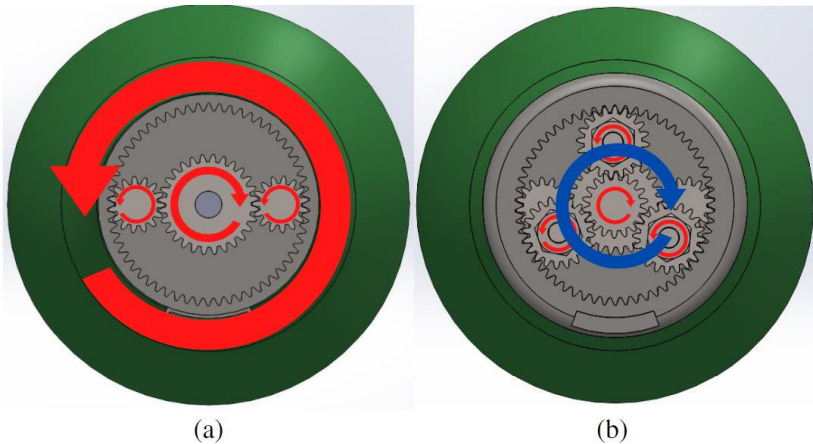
(a) First gear set’s and (b) second gear set’s movements. Both sun gears are designed to be in one shaft (see Figure 2).
